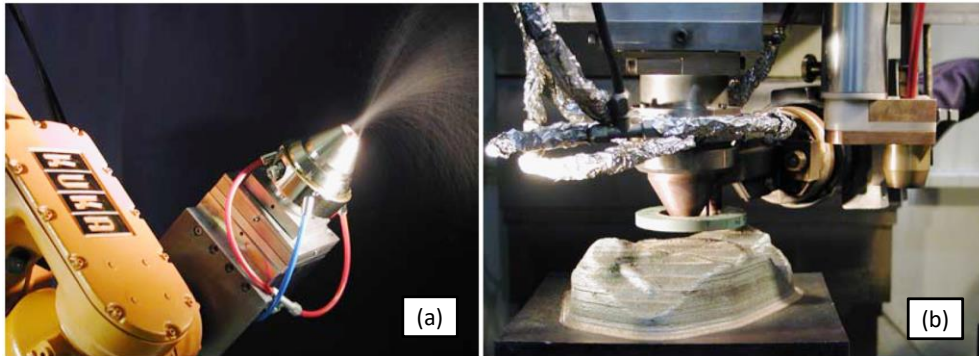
(a) COAX10 in a robot guided 3D cladding system, (b) High-speed generation of a tool section by induction assisted laser beam build-up welding (Nowotny et al., 2003).
